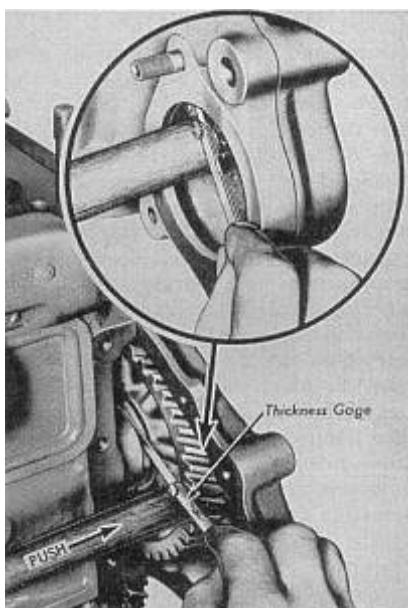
If camshaft end play exceeds .006 when checked as shown, install a thinner gear cover gasket or a new cover.
